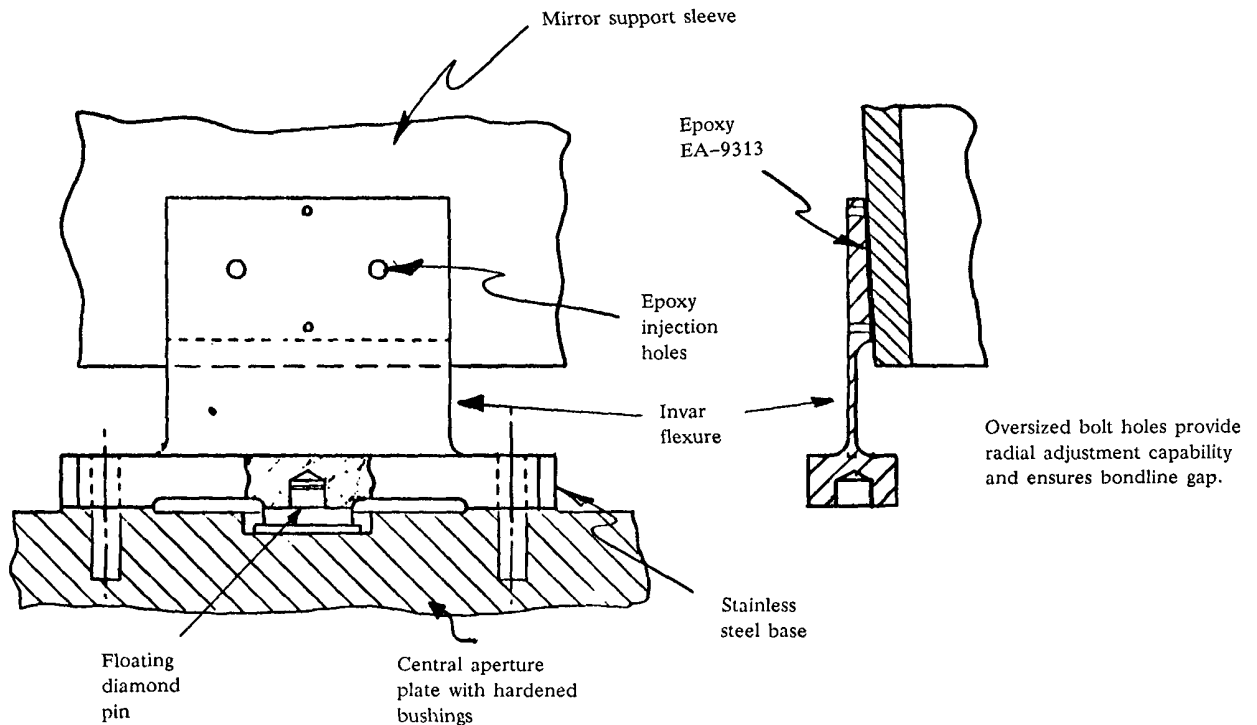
Mirror support sleeve fittings permit disassembly and accurate reassembly of mirror cells.
